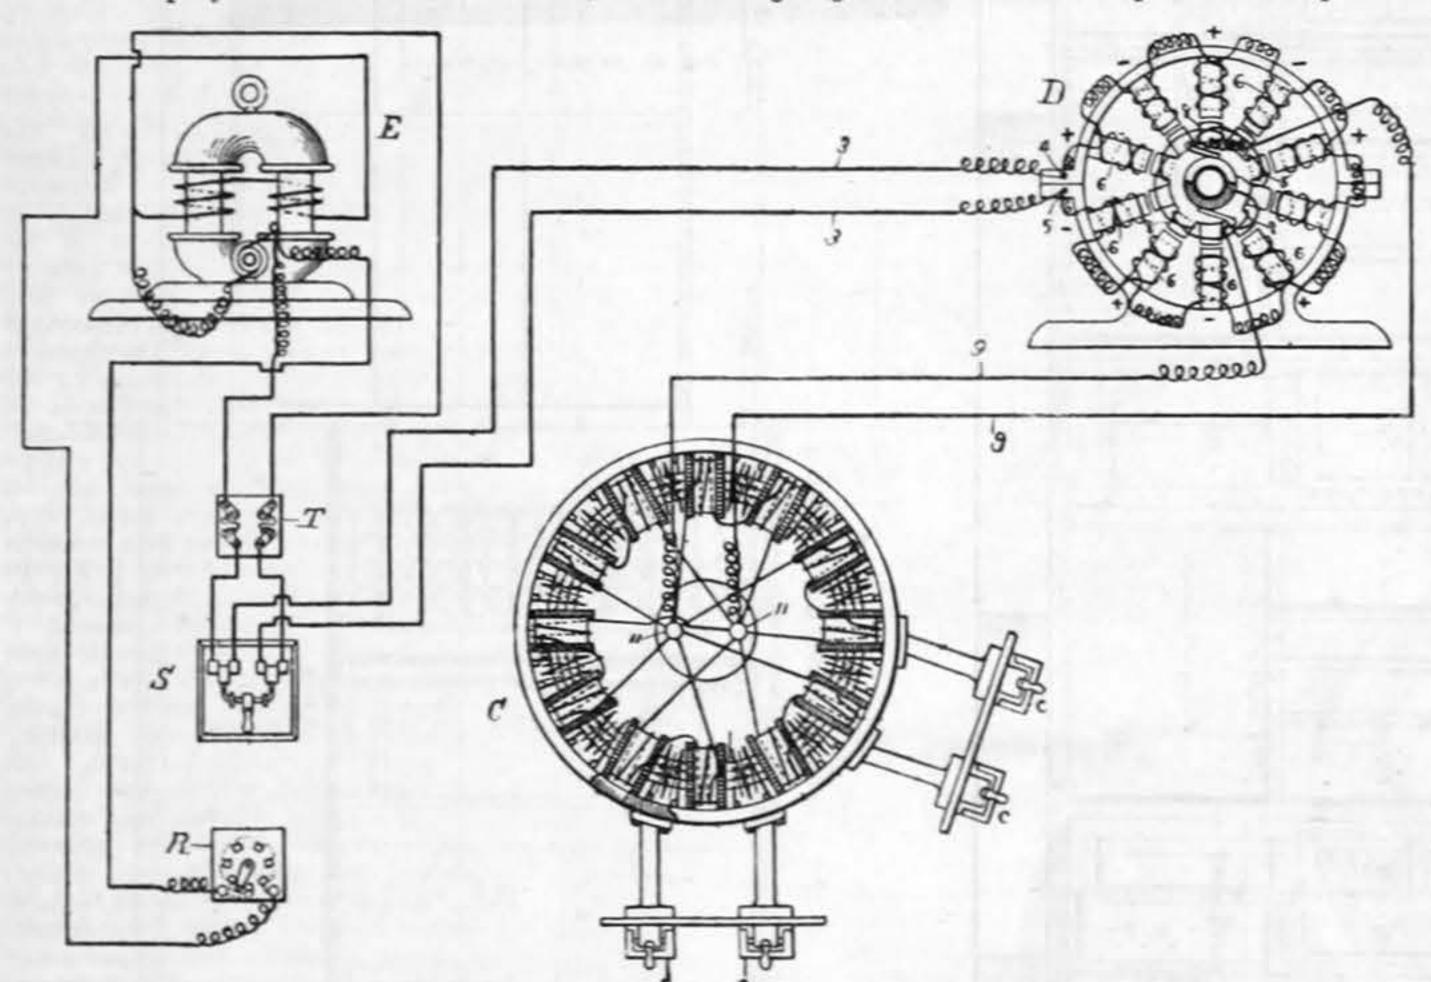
CONNECTIONS, BURTON SYSTEM OF ELECTRIC FORGING
